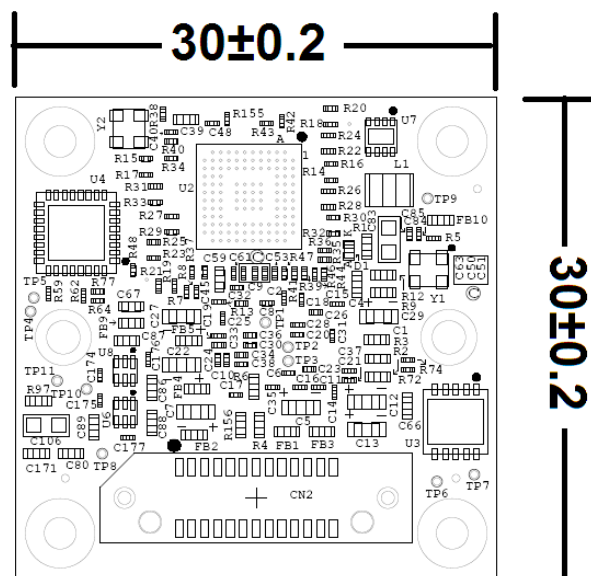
Rear View of e-CAM24_CUNX Module Board Mechanical Dimensions
